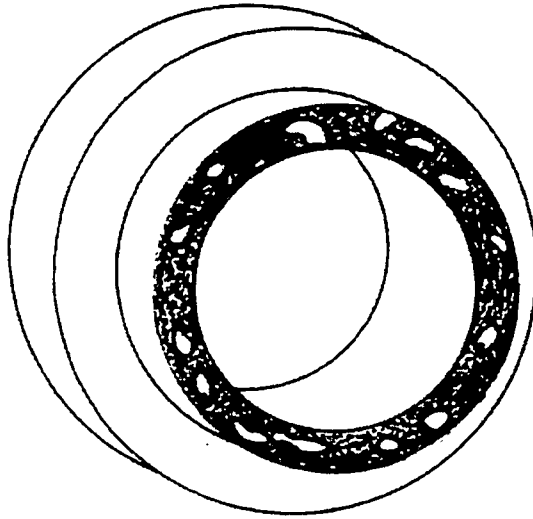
Pitting, Blistering, Corrosion¹⁶
